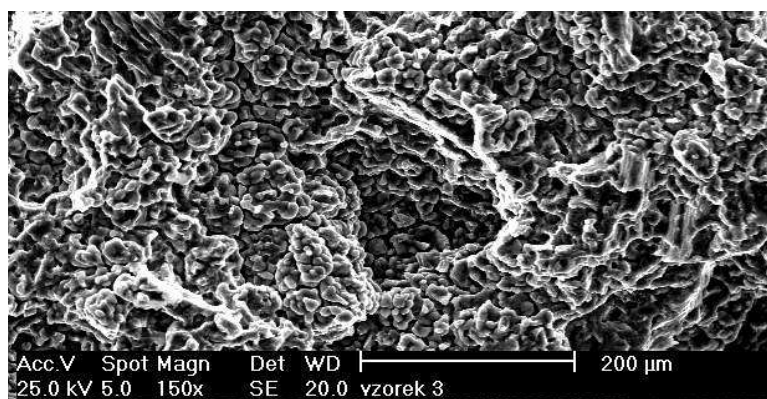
The fracture surface of fatigue test sample of AZ91 cast alloy A
